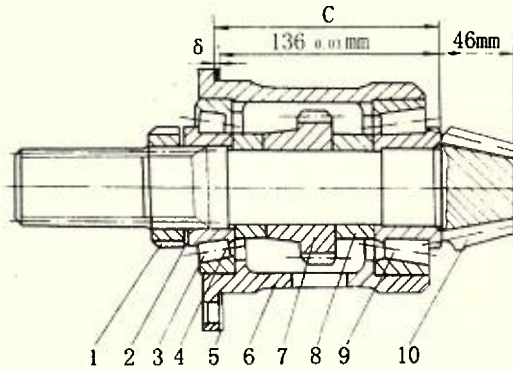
17 Installation dimension of driving spiral bevel gear
